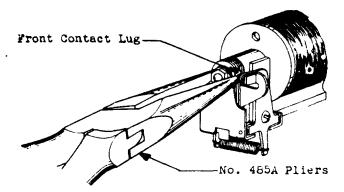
Adjusting for Contact Separation by Adjusting Front Contact Lug to Left
